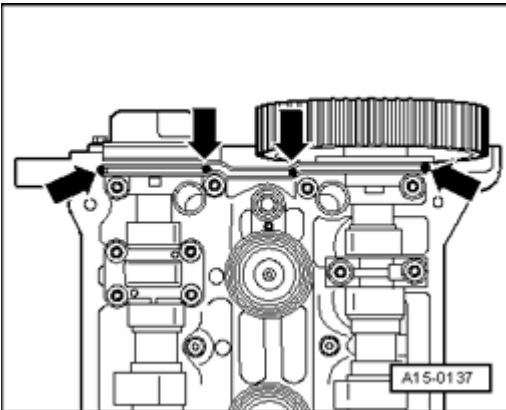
Sealing Transition Points Between Double Bearing Cap And Cylinder Head
